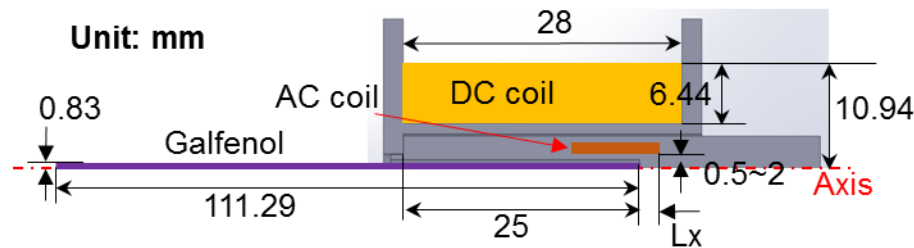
Dimensions and geometry of the cross section view of the magnetostrictive transducer and waveguide. The full sensor is revolved around center axis shown.
